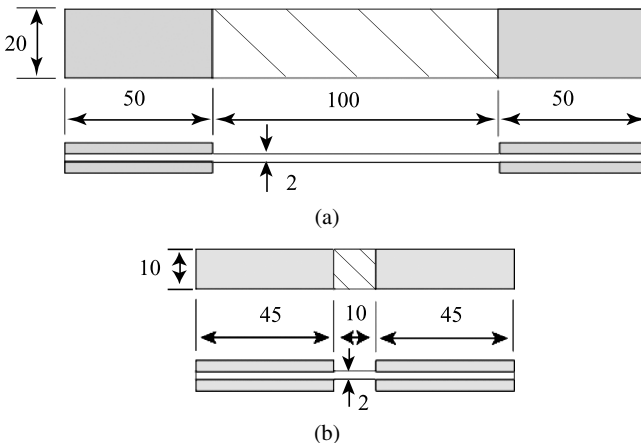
Specimen geometry (dimensions in mm): (a) gauge length 100 mm; (b) gauge length 10 mm.
